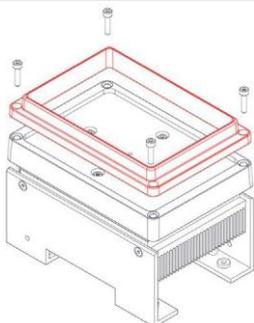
Unscrew the 4 screws at the corner and remove mounting frame.
